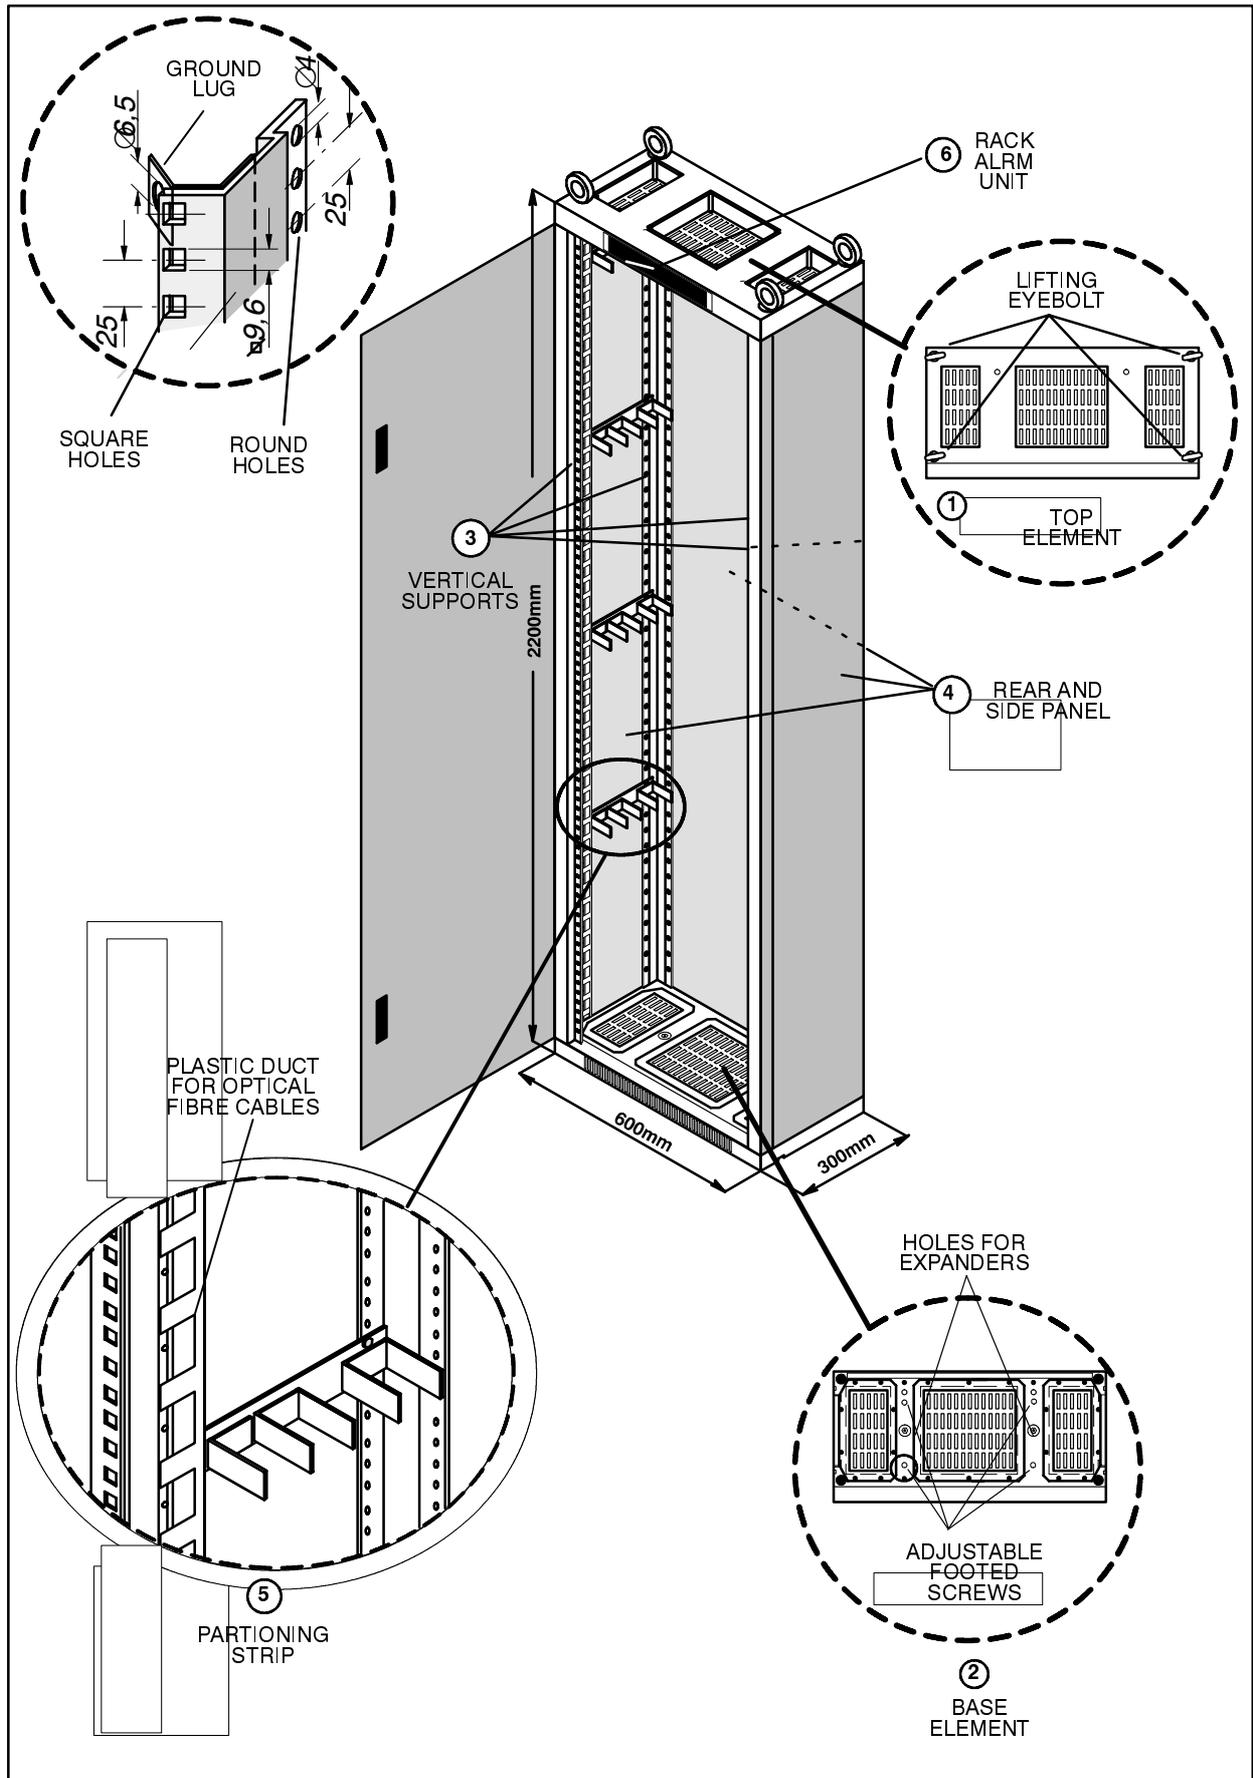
Dimensions and Mechanical Structure of the rack
